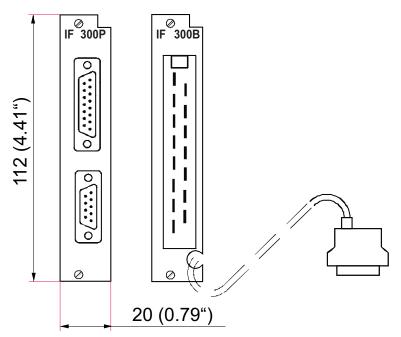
Dimensions of interface and relay boards Dimensions in mm
